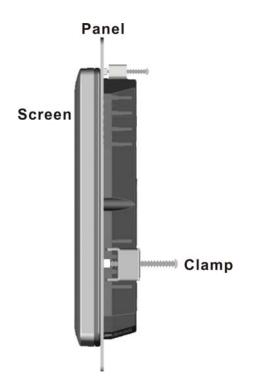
Tighten the Panel Mounting Clamp Screws
